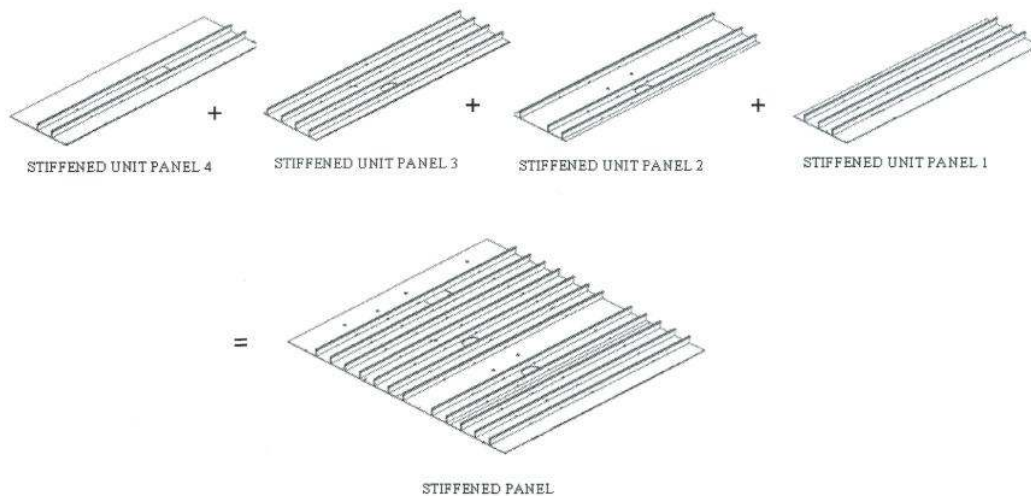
Assembly sequence on the Lean unit panel assembly line workstation 4
